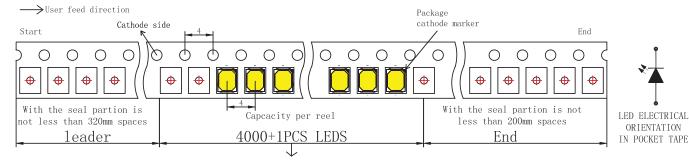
Pocket tape dimensions for LUXEON 2835 Line.
